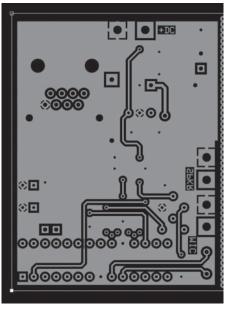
This is an X-ray view of the bottom of the circuit board. Note the location for the Lantronix XPORT module in the upper right corner.
